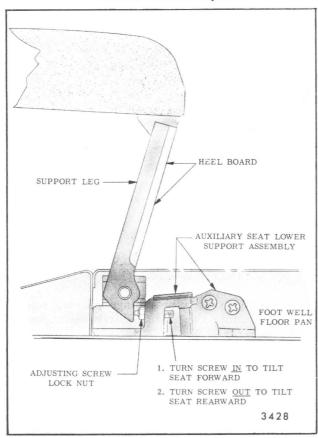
Auxiliary Seat Adjustment - Cadillac Limousine Styles
